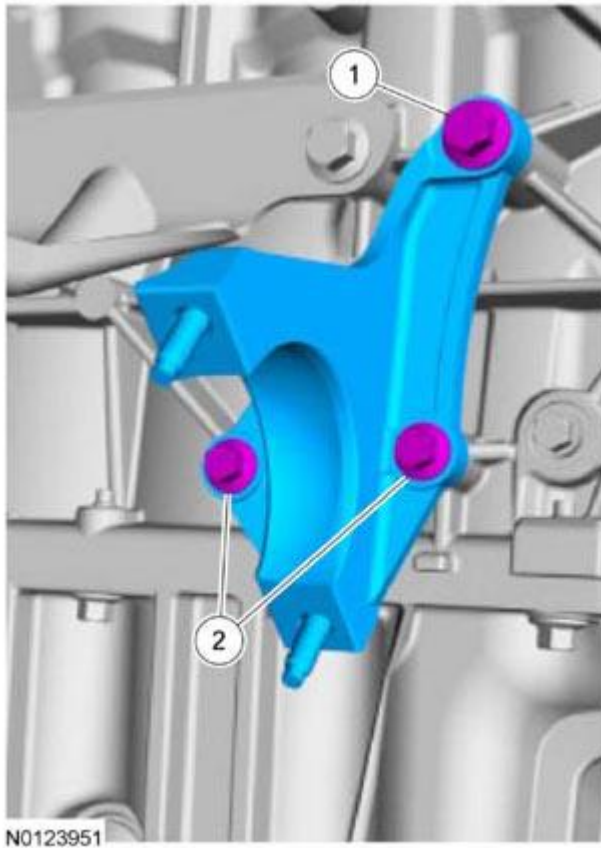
Identifying Halfshaft Bracket And Bolts Tightening Sequence
